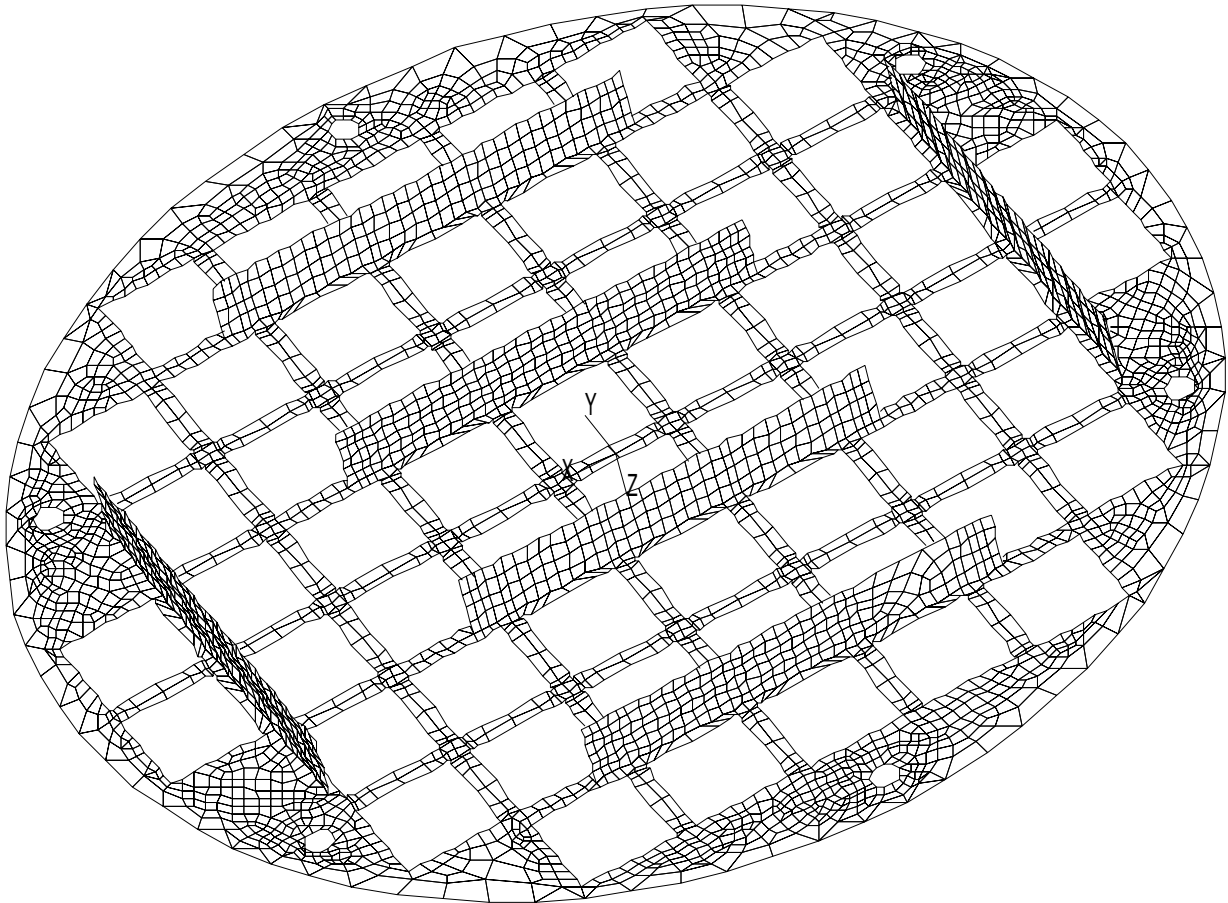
BWR Bottom Weldment Plate Finite Element Model
